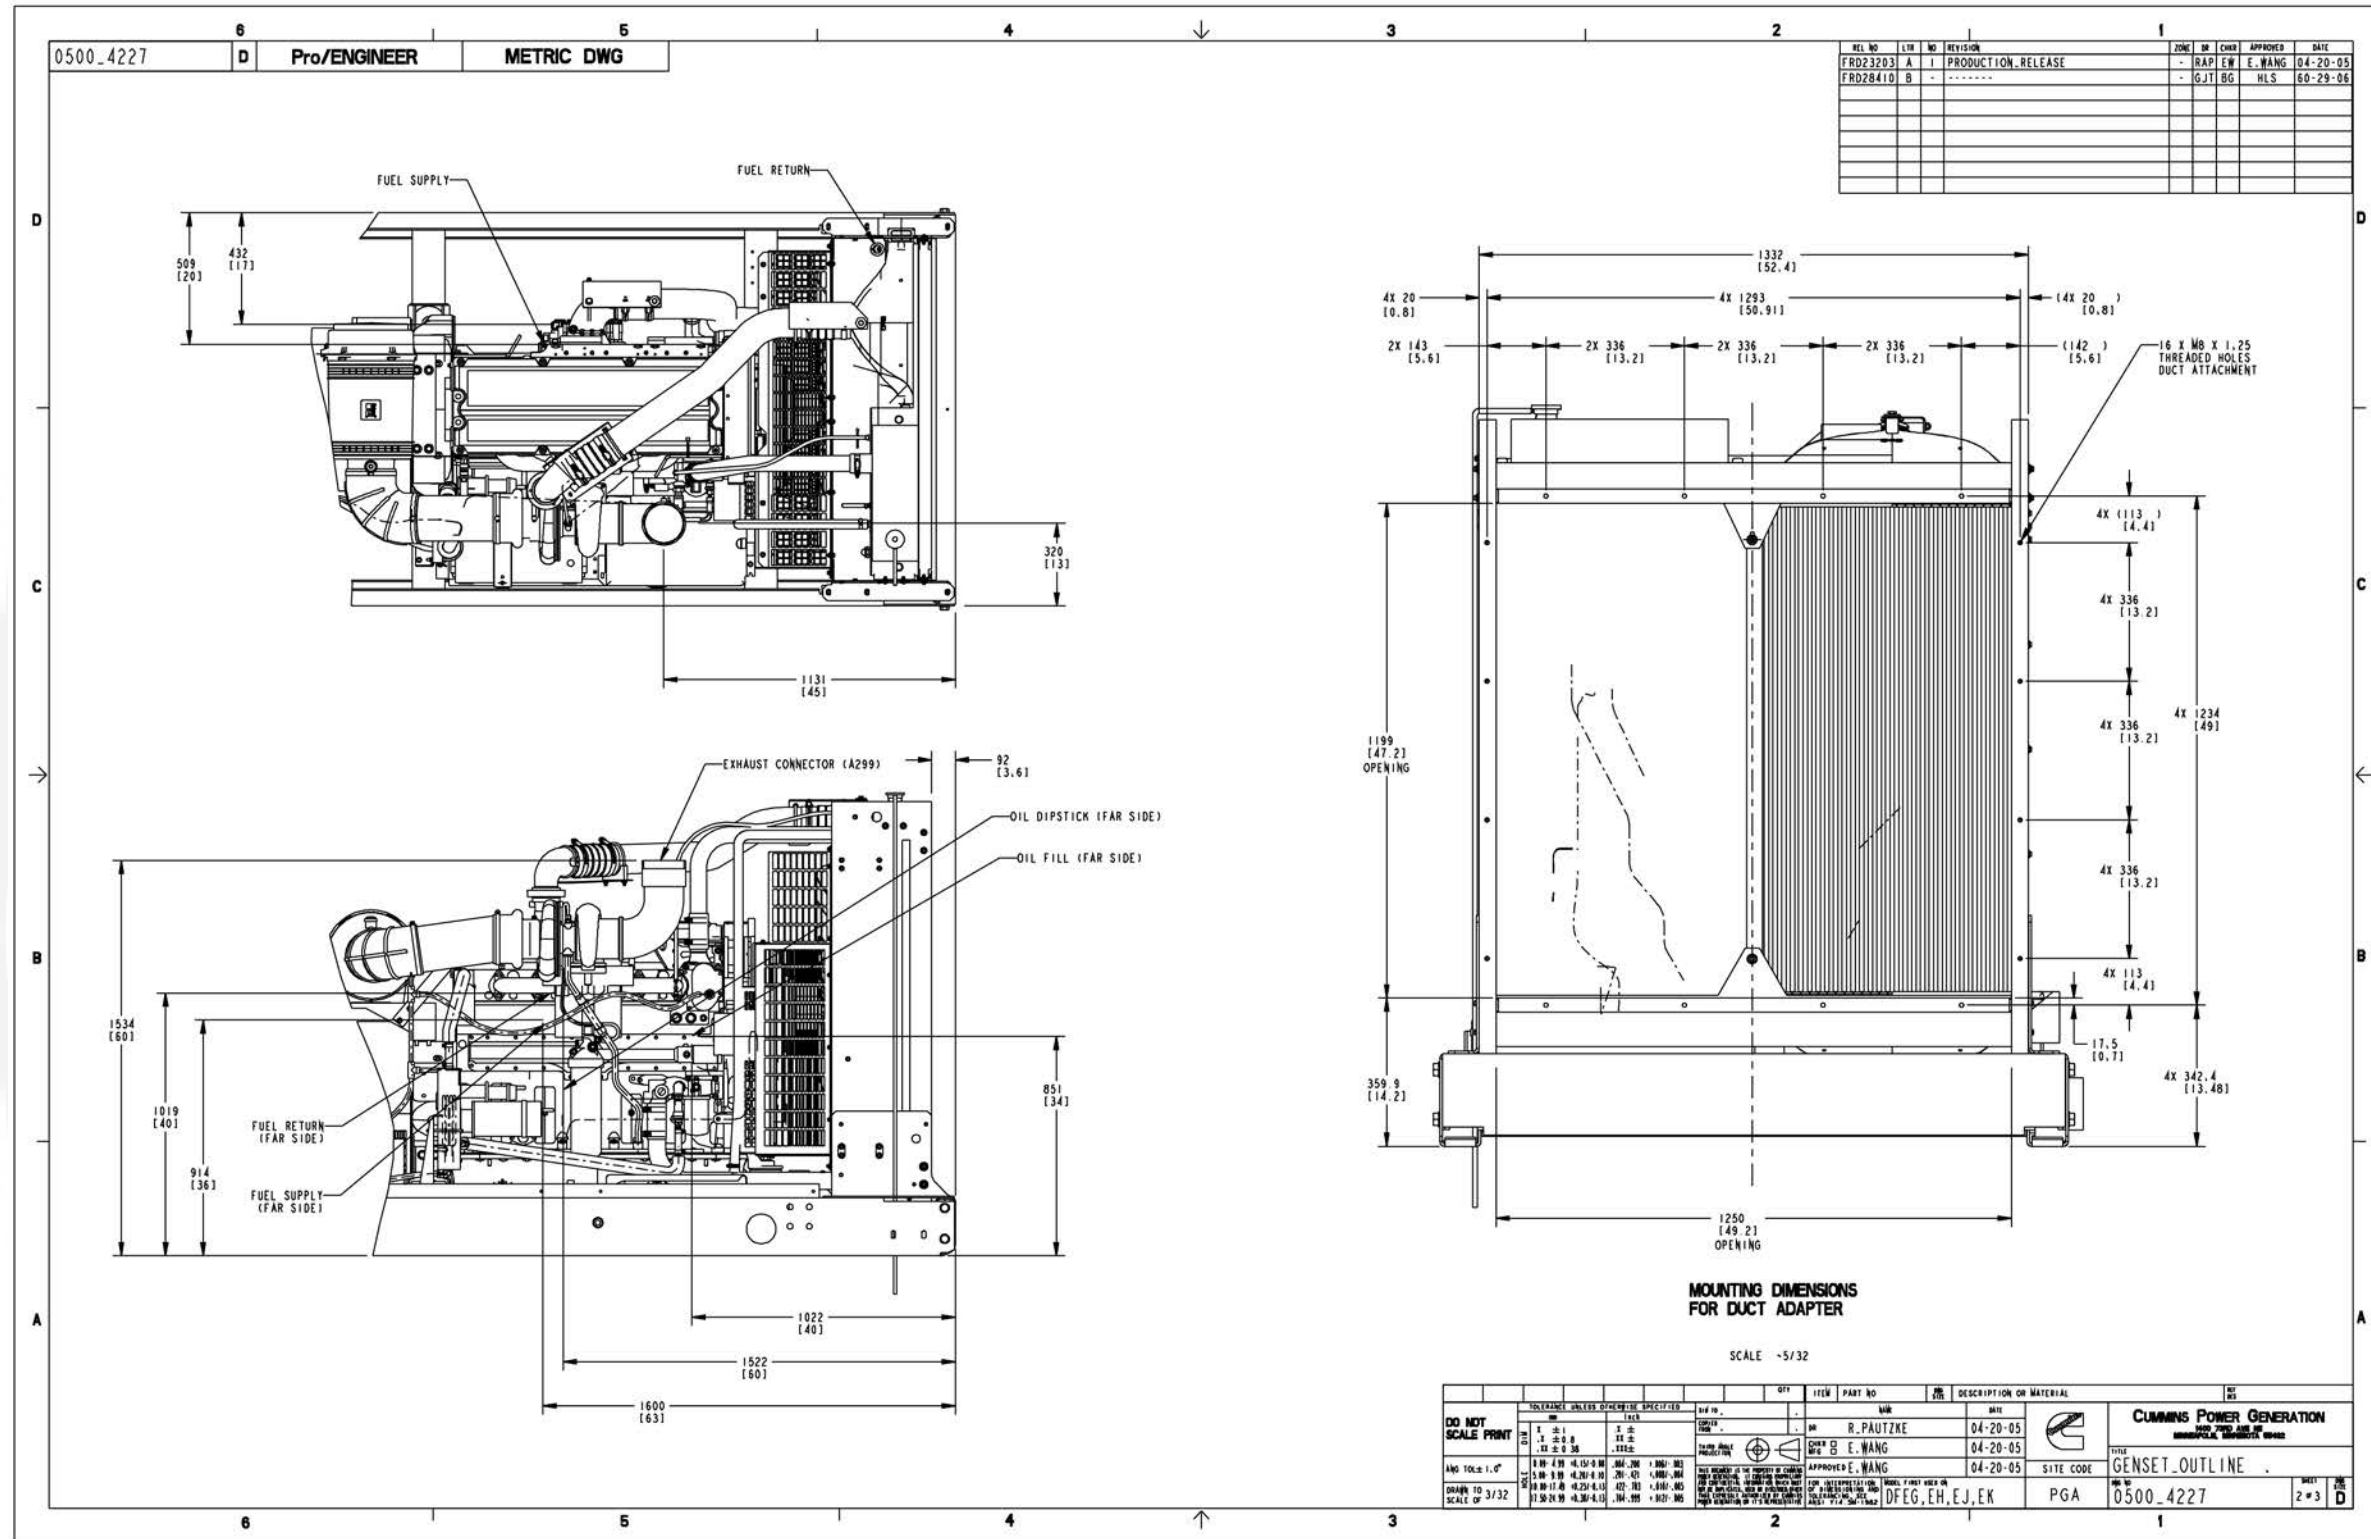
GENERATOR SET OUTLINE DRAWING (SHEET 2)
